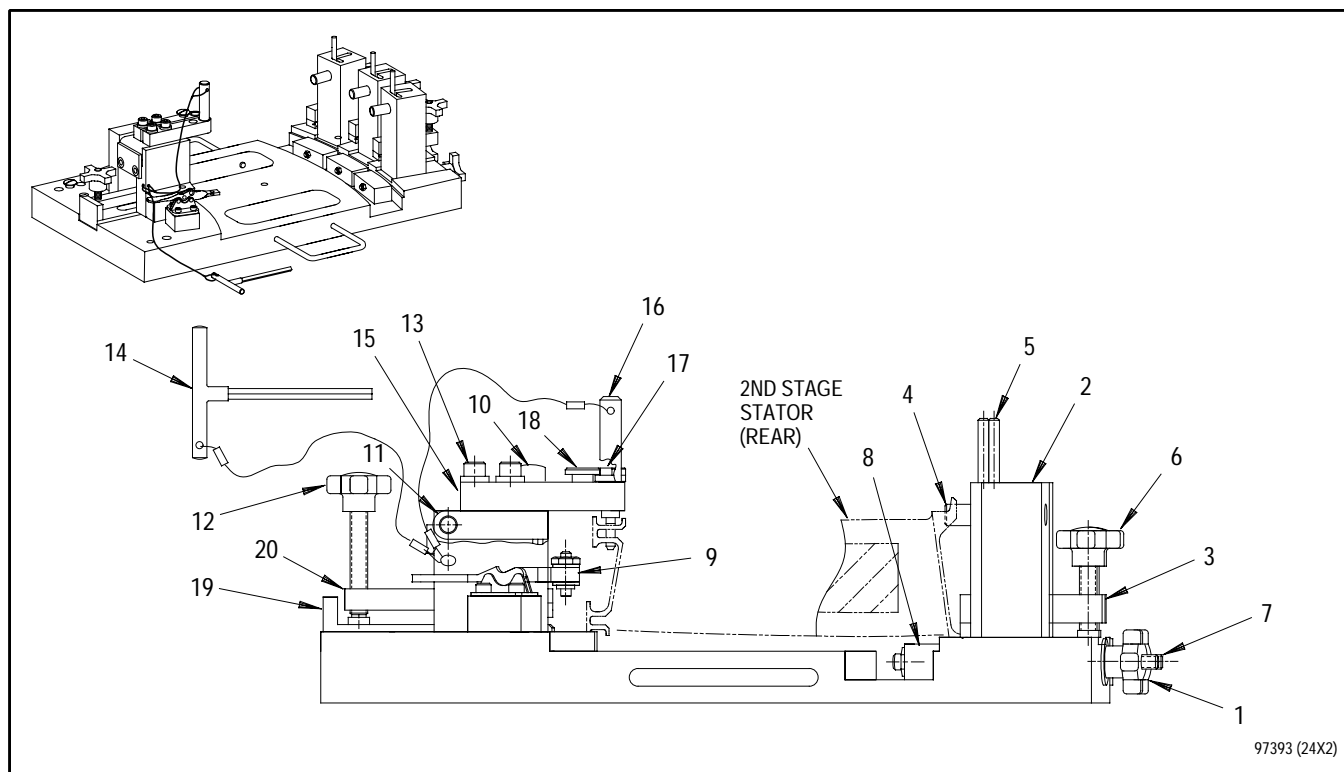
Second Stage Compressor Stator Assembly - Front Retaining Pin Removal Using PWA 71278 Fixture
